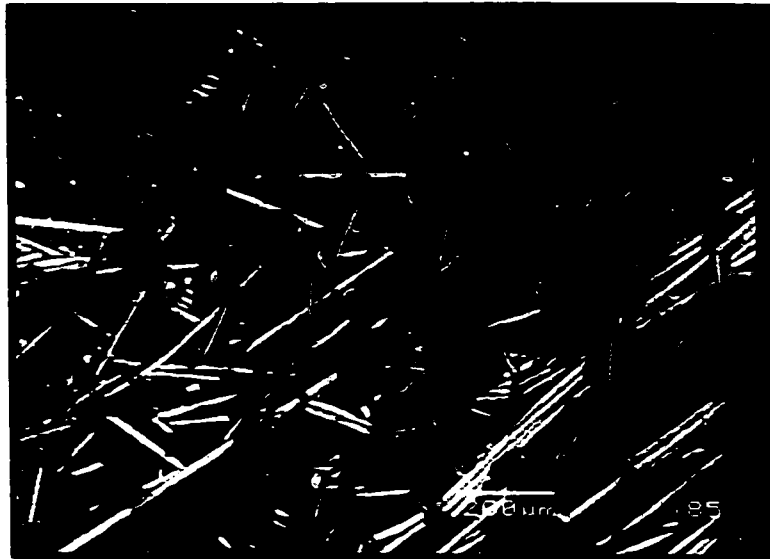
Fracture surface around point 3 near outer wall
